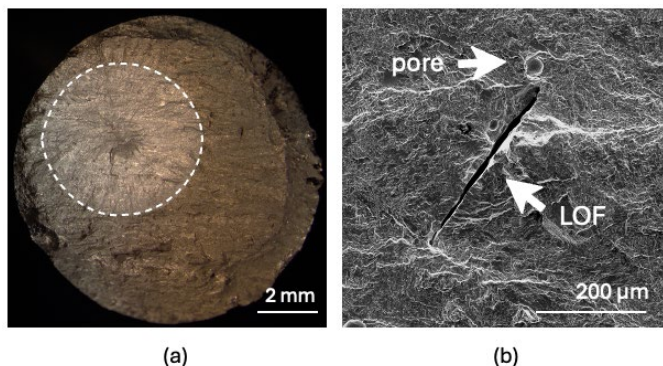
(a) Typical fatigue fracture surface. (b) common defects found in as-built metal.
